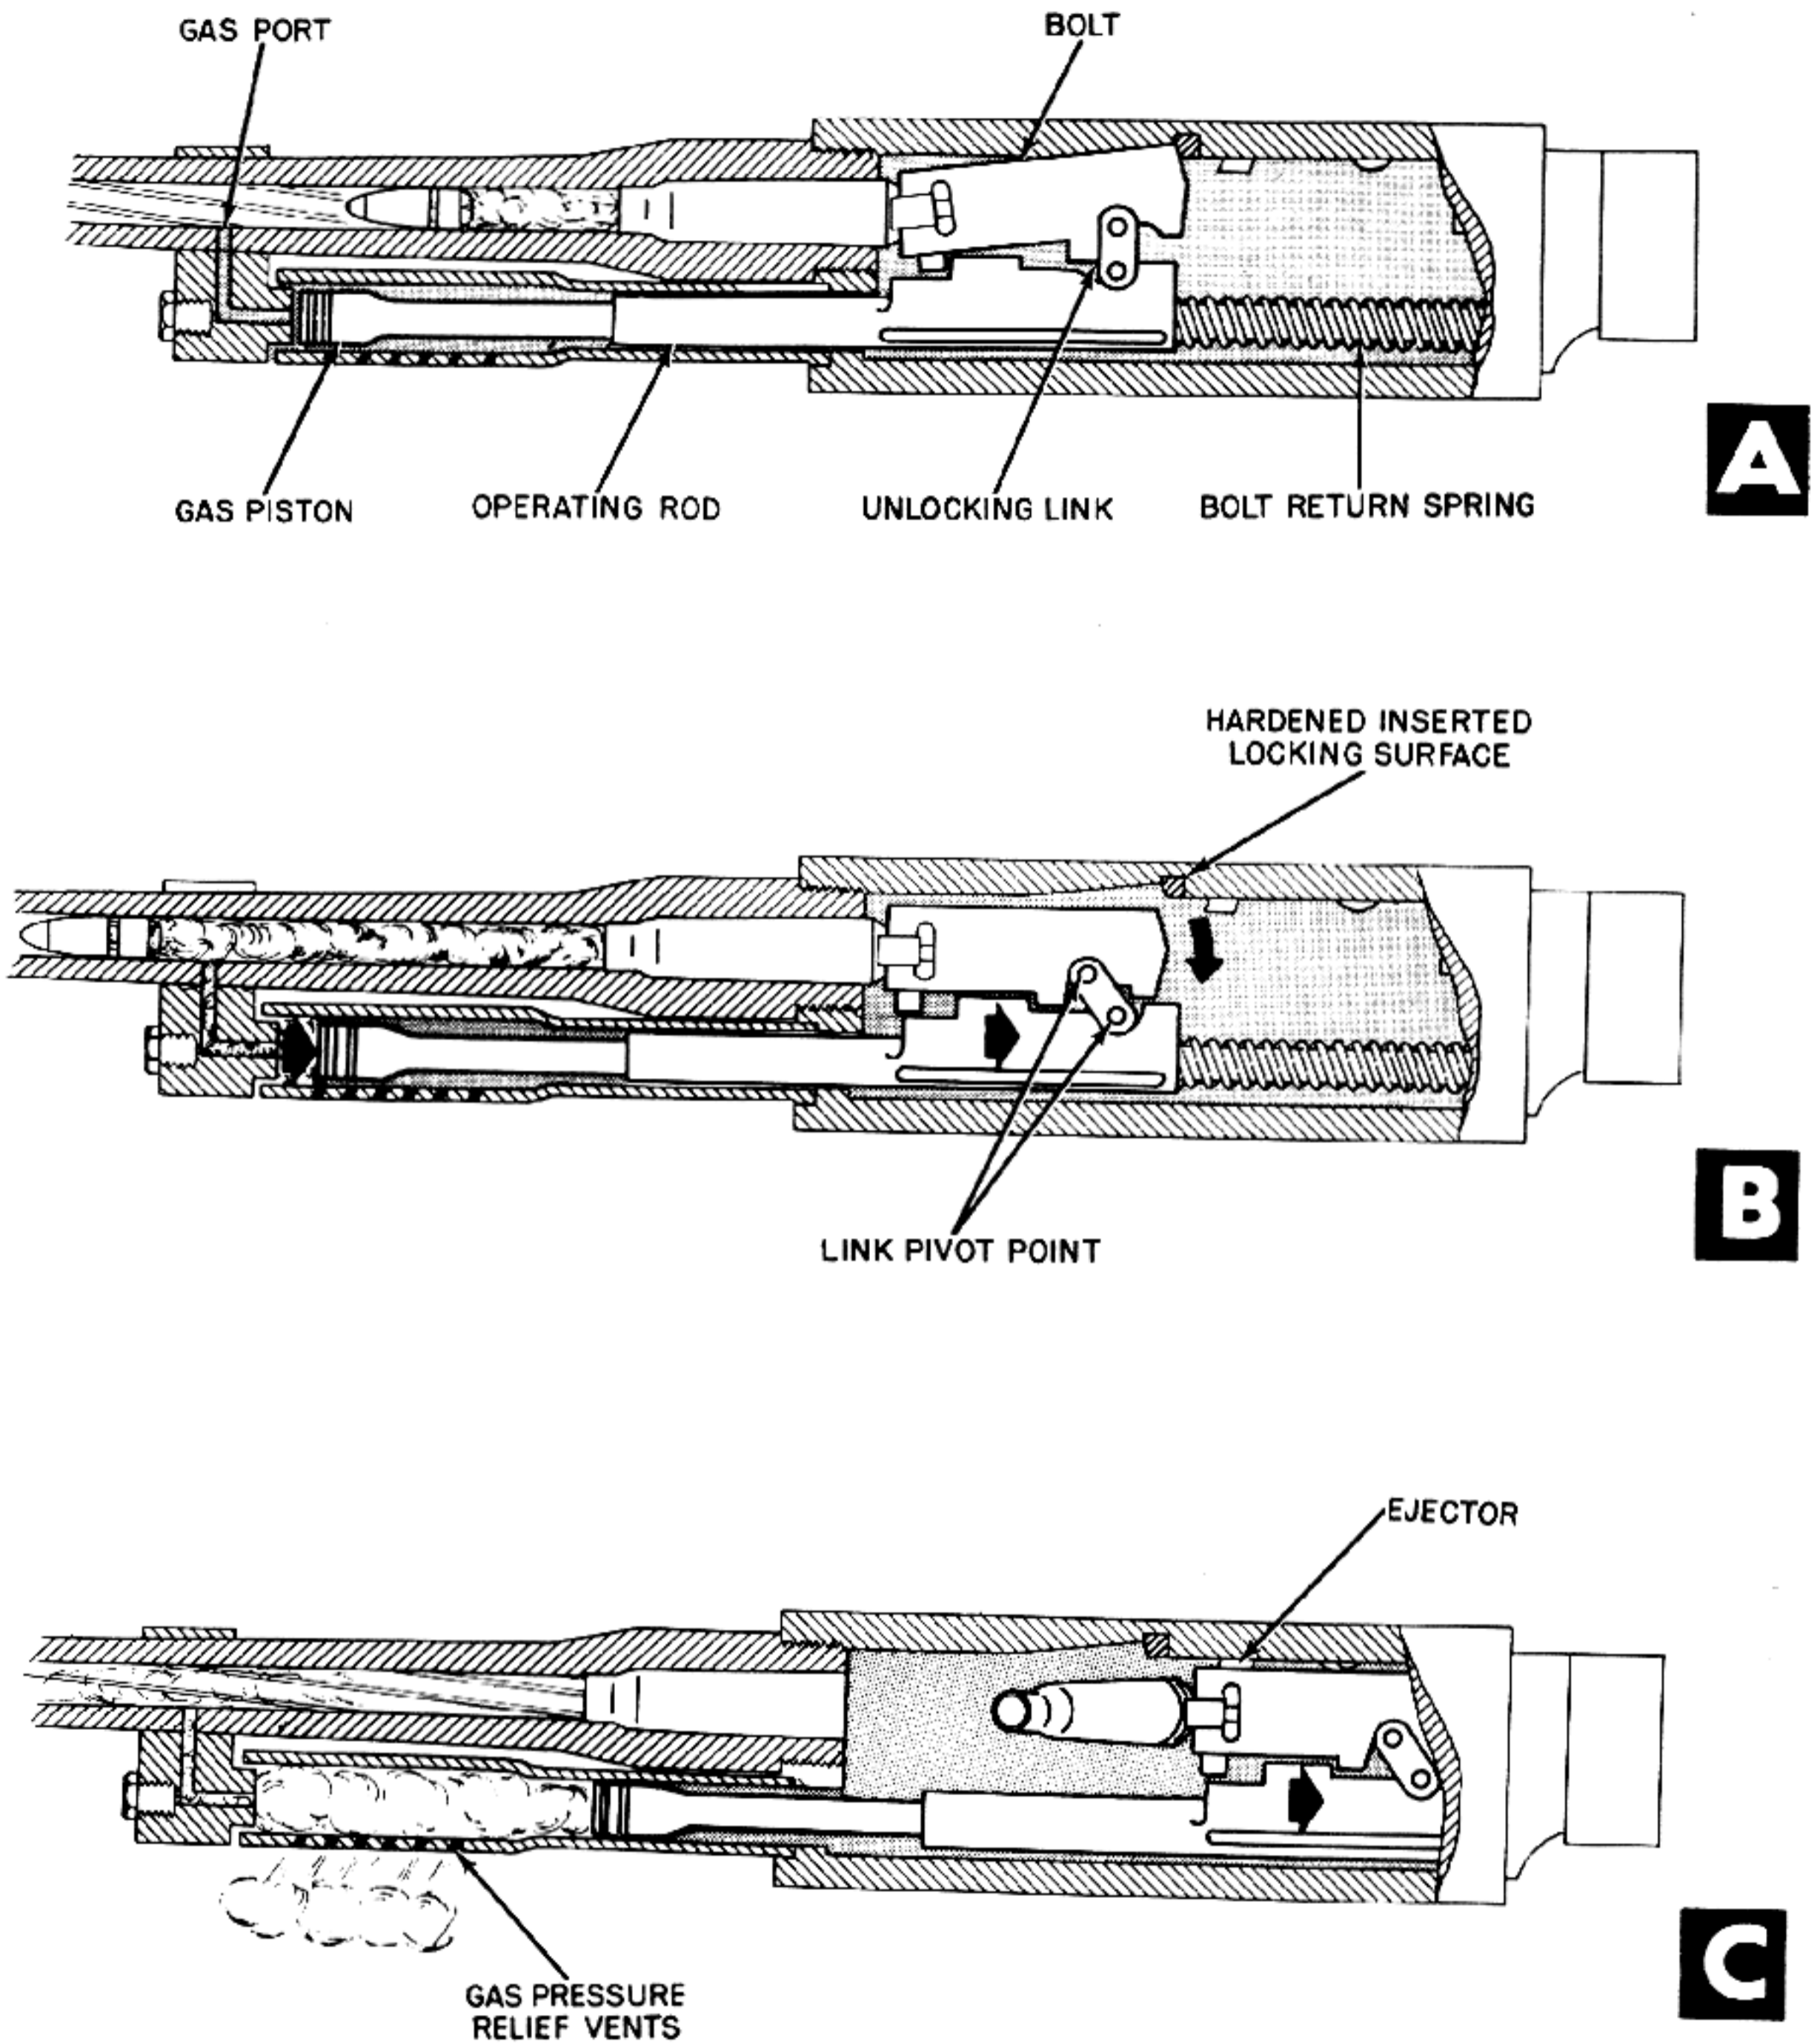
Recoiling Link Pulls Bolt Free of Locking Surface.
